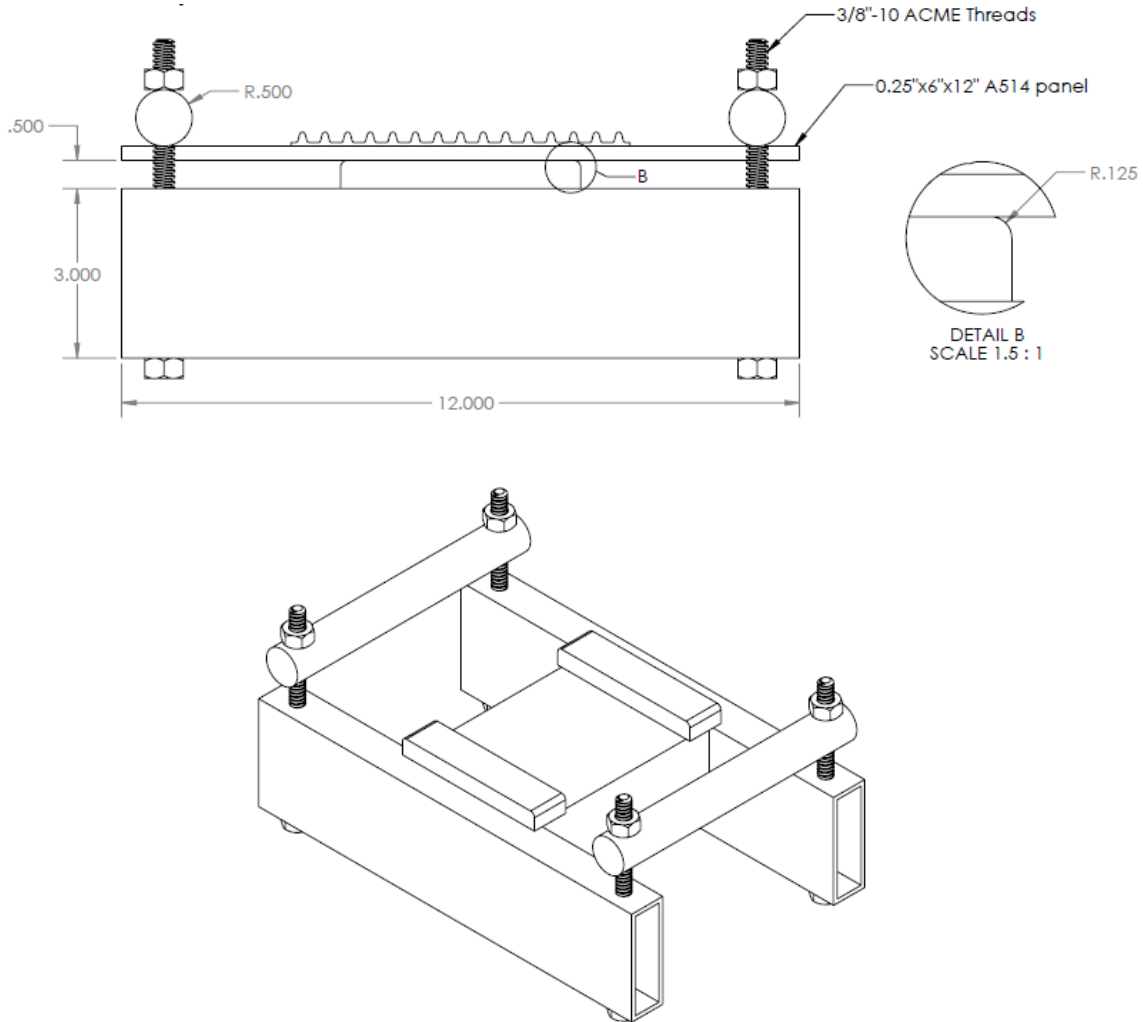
Side view (top) and final assembly (bottom) drawing of the four-point bend fixture.
